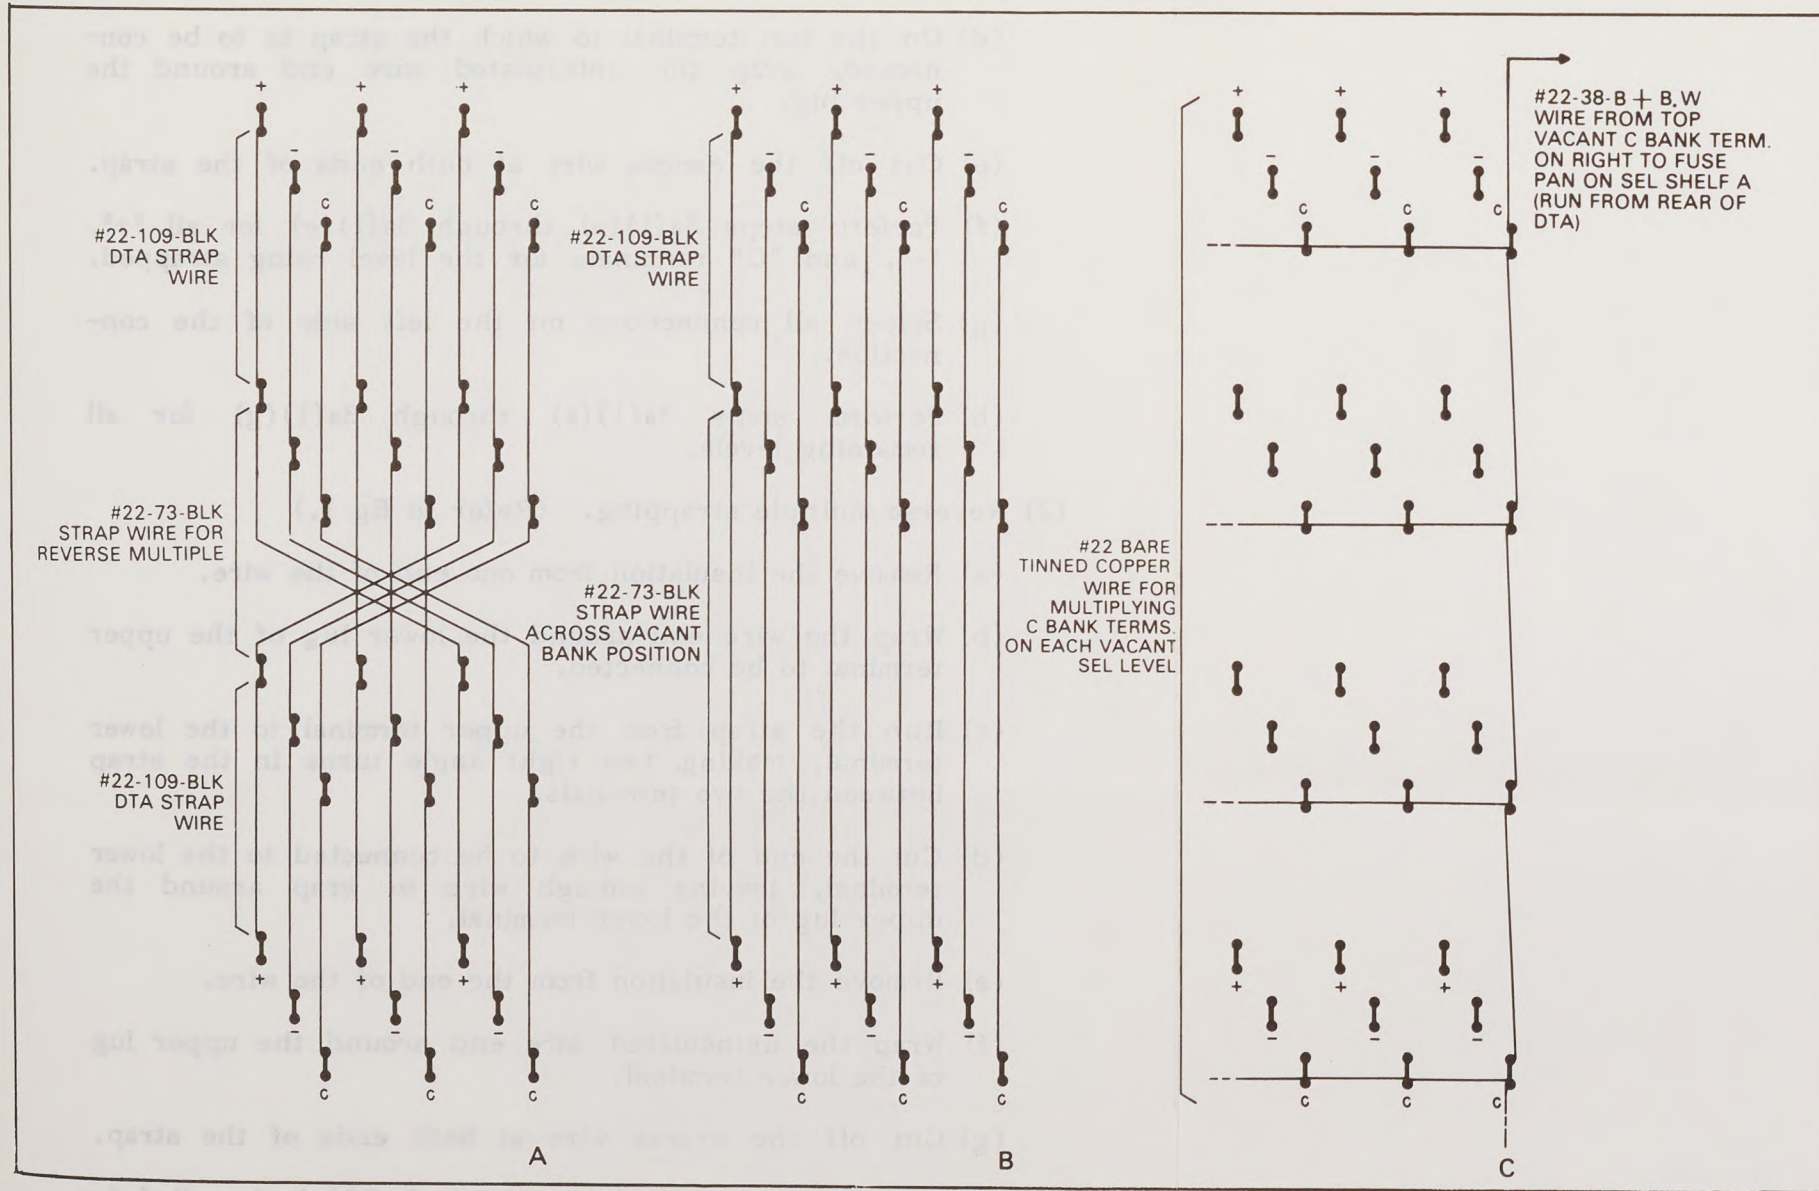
Types of Strapping on DTA Bank Terminal Boards.
